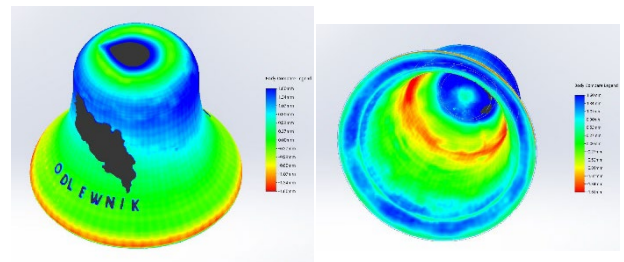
A comparative analysis of the designed bell body and the scanned DZ1 bell casting made using a strickle board
